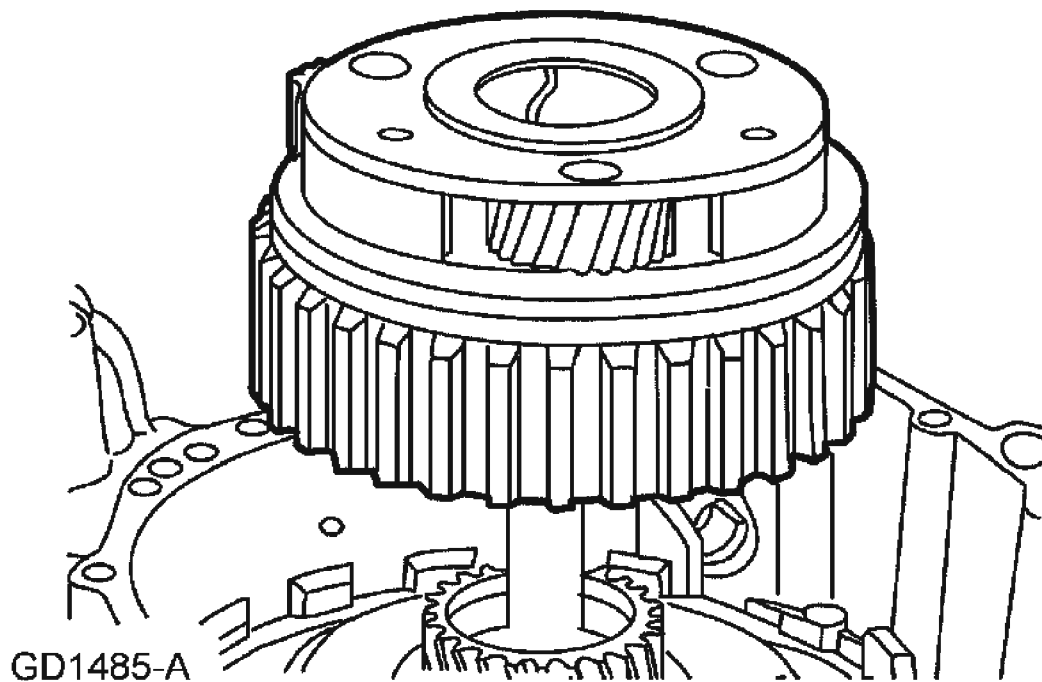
Removing No 9 Reverse/Overdrive Ring Gear Thrust Bearing
